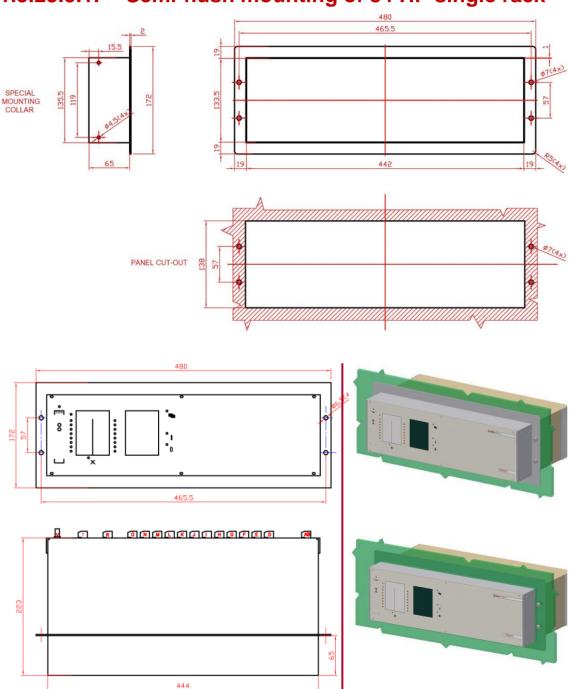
Dimensions for semi-flush mounting of 84 HP single rack with 3D illustration
